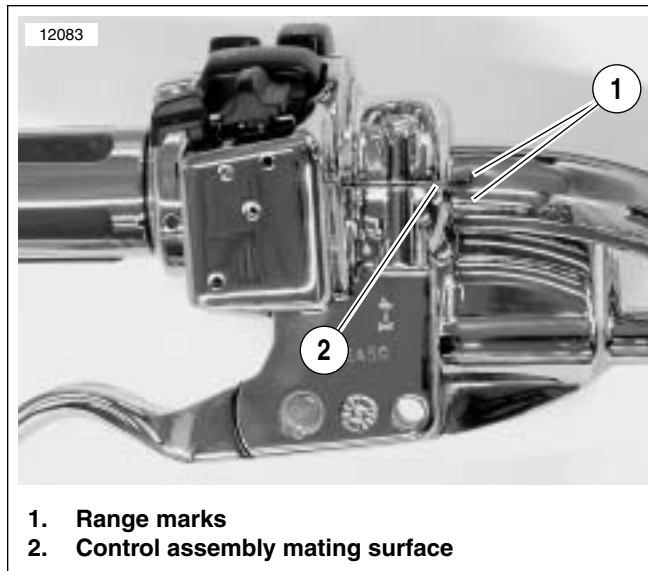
Range Marks (Handlebar Control Assembly Bottom View, Left Side Shown)
